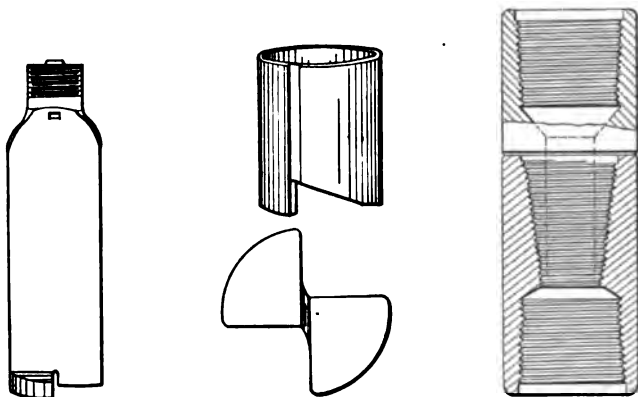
Drag bit. FIG. 128.—Drag shoe. FIG. 129.—Rotary tool joint.
